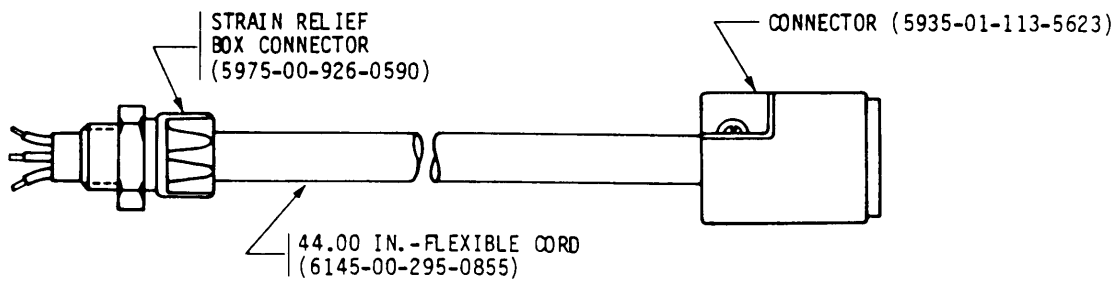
Power Cable Assembly, 11021163, Unit 1, M35A2.
